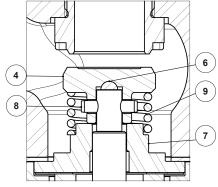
Detail A 1/2" to 2" – DN 15 to DN 40
